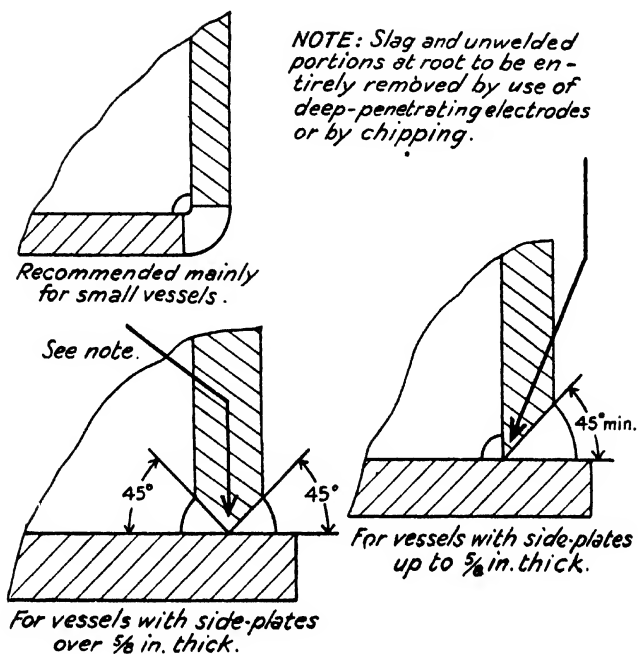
RECOMMENDED CORNER WELDS FOR CAUSTIC SODA TANKS
